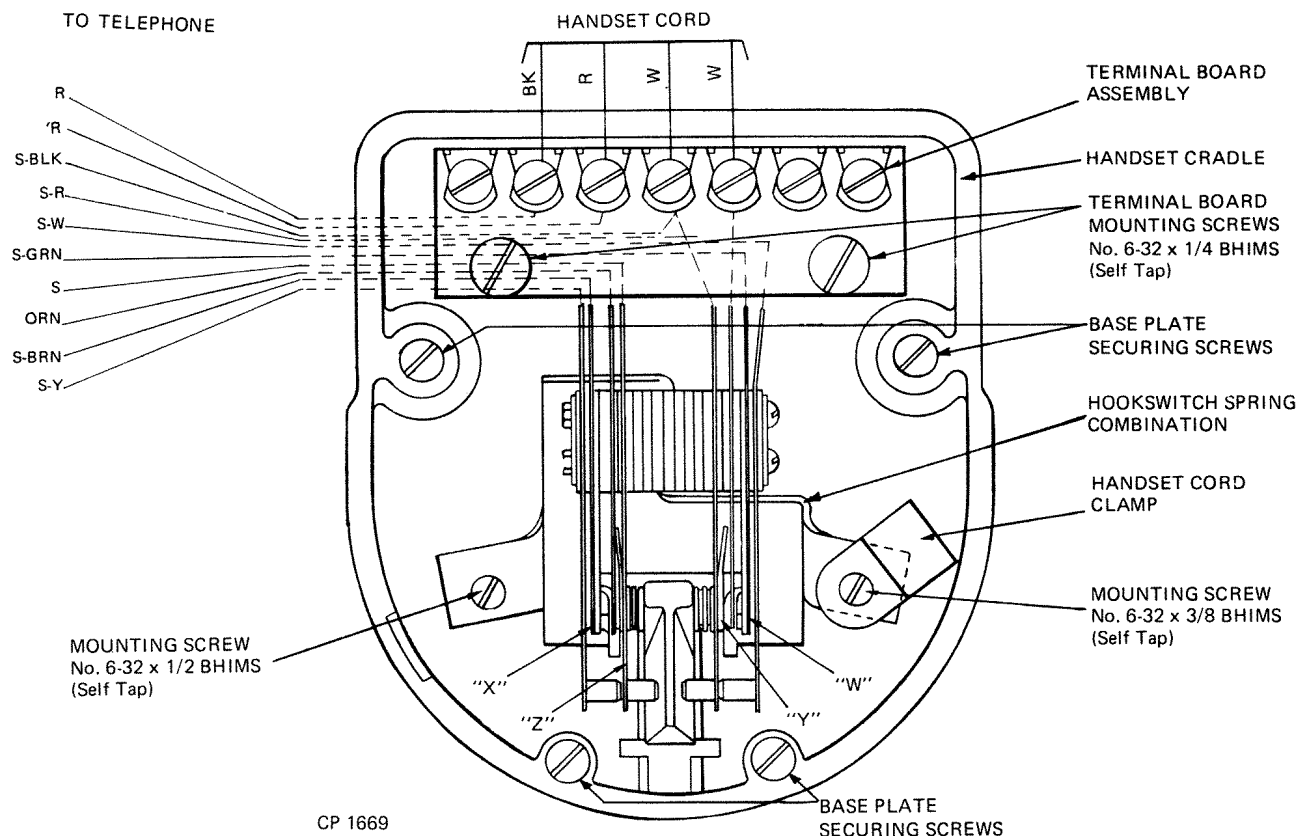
Handset Hookswitch Assembly and Wiring Diagram
